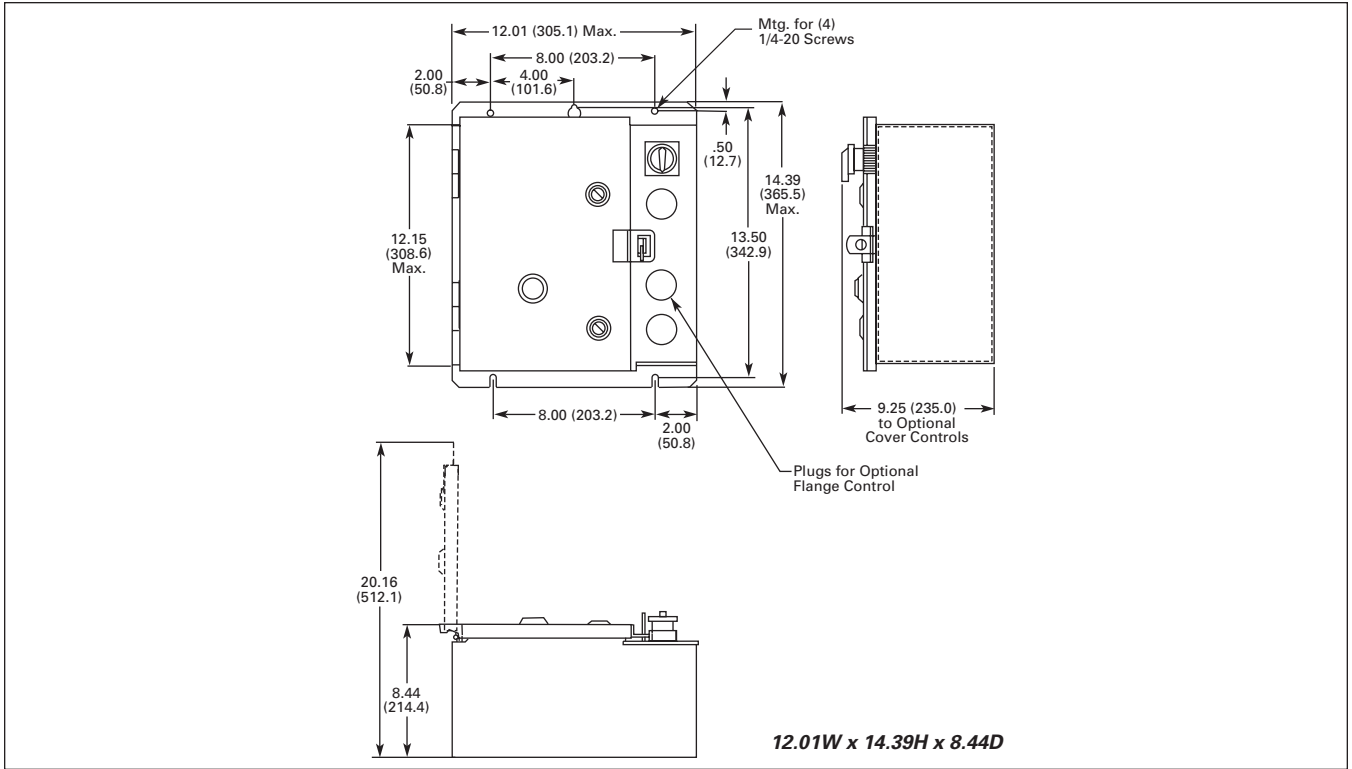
Box 6A, Type 12 — Approximate Dimensions in Inches (mm)
